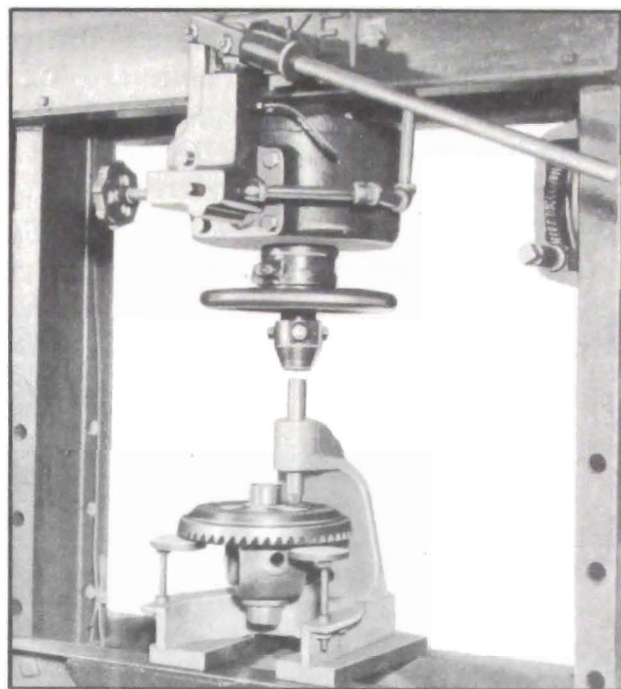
Riveting Ring Gear to Case in Riveting Jig J 2196-A
